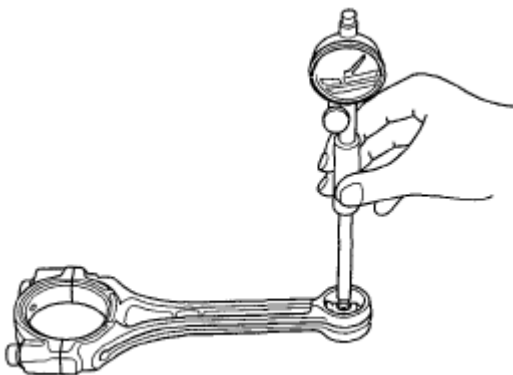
Checking Difference Between Piston Pin Diameter & Connecting Rod Small End Diameter
